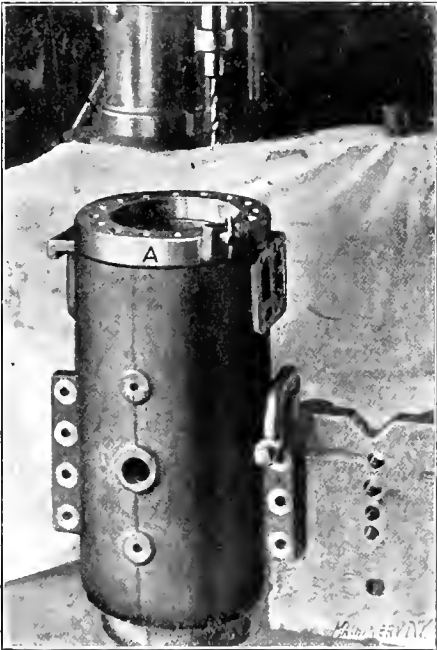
Drilling and Tapping the Cylinder Head Stud Holes
